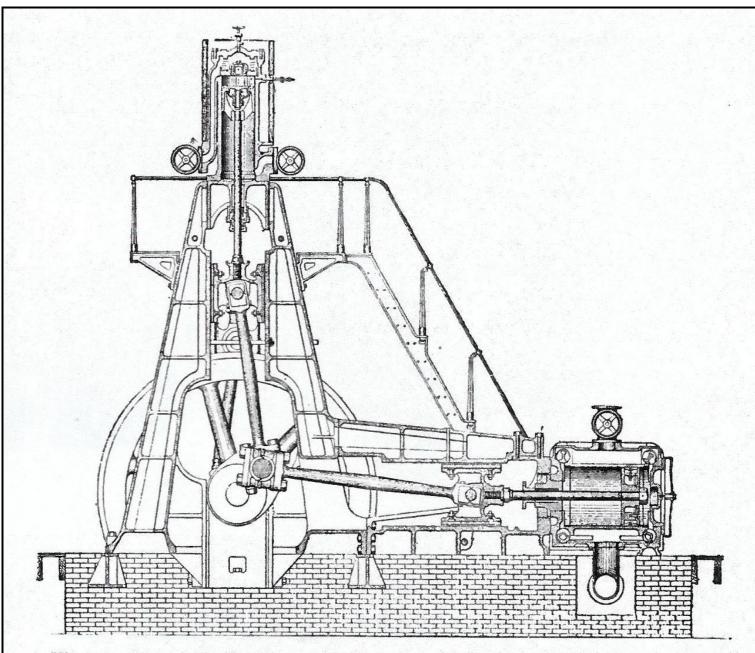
Large Single-Acting Vertical Type Frick Ammonia Compressor and Horizontal Steam Engine. Sectional Elevation of Complete Machine.
